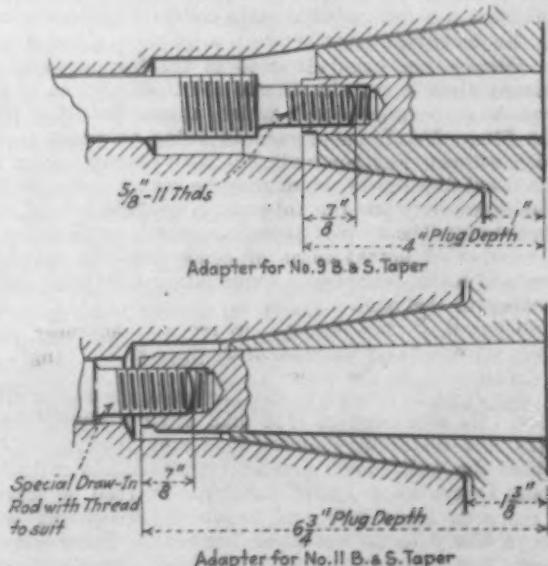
Adapters for Arbors, End Mills and Other Tools Having a Threaded Hole for the Draw-in Bolt
